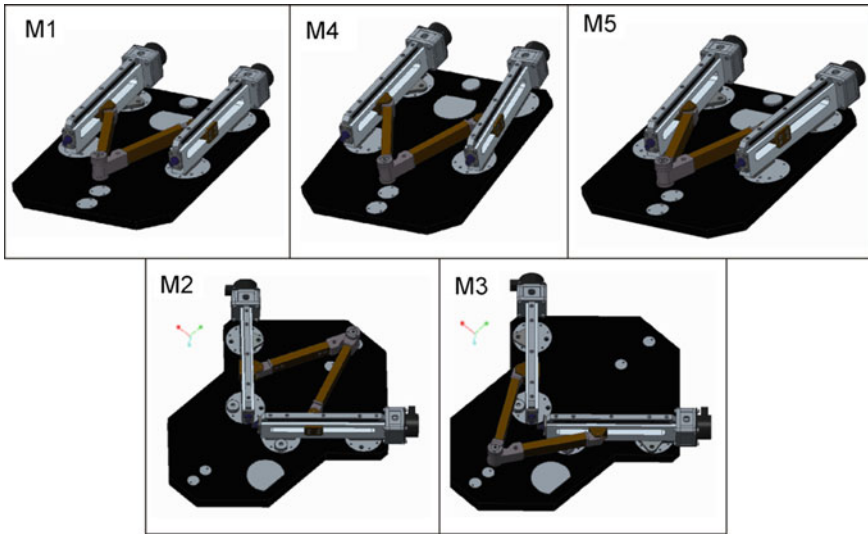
CAD models of the basic types M1–M5 reconfigurable 2-axis parallel mechanism
